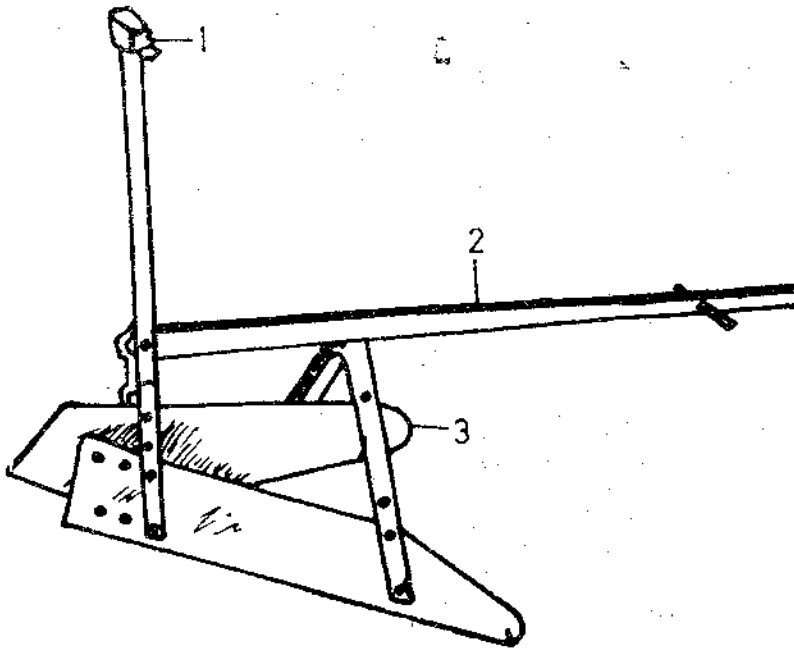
Bund former. 1. Handle. 2. Beam. 3. Forming board.
